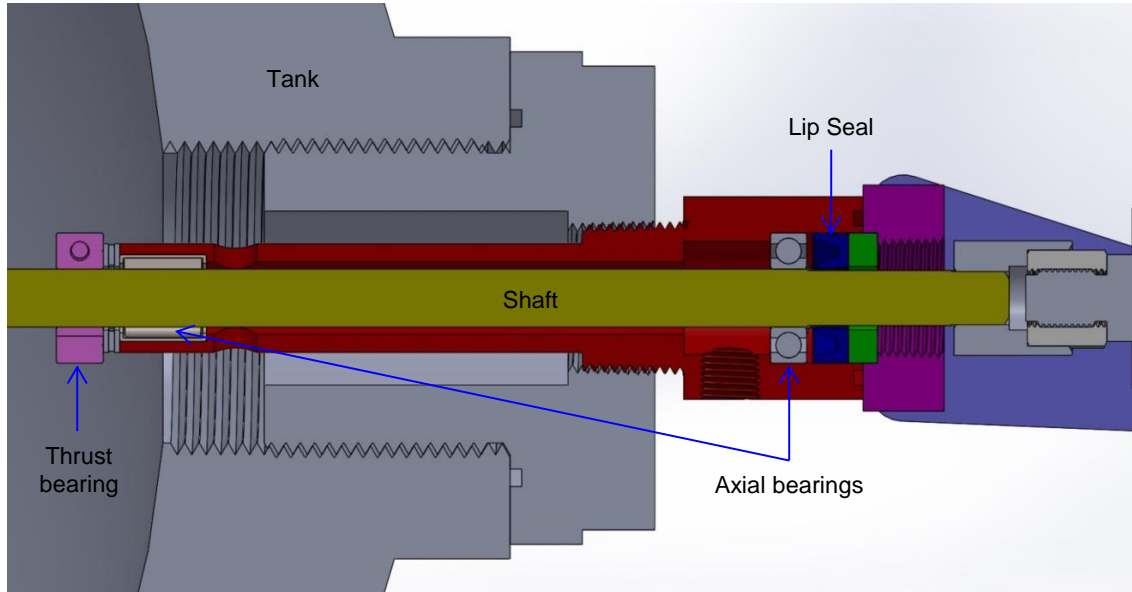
Cutaway view of the mixing impeller bearing and seal mount showing the axial and thrust bearings and the CO<sub>2</sub> inlet path
